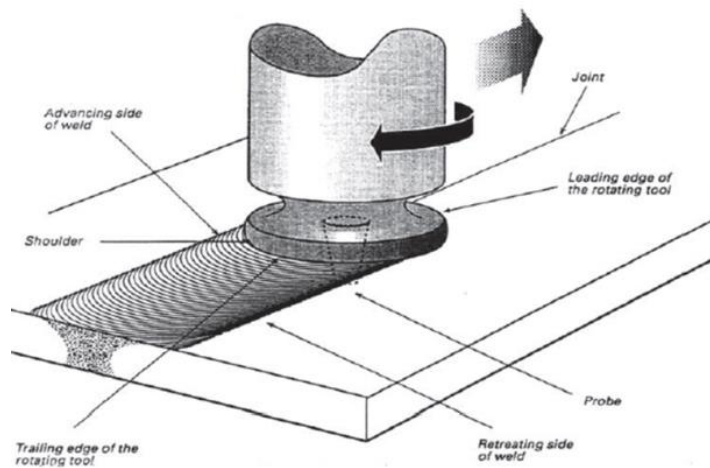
Schematic of friction stir weld in a butt weld configuration [2,15].
